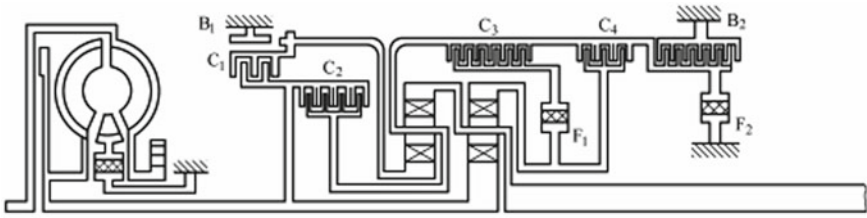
4 speed Simpson planetary gear train. B₁—2 speed and 4 speed brake, B₂—low and reverse gear brake, C₁—reverse clutch, C₂—high gear clutch, C₃—forward clutch, C₄—forward force clutch, F₁—forward OWC, F₂—low-gear OWC
